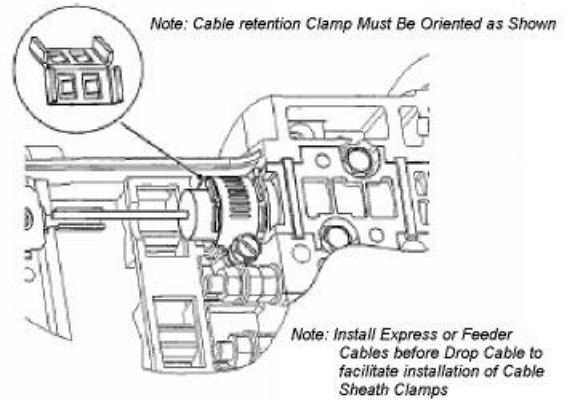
Attaching Cable and Central Strength Member to Center Section
